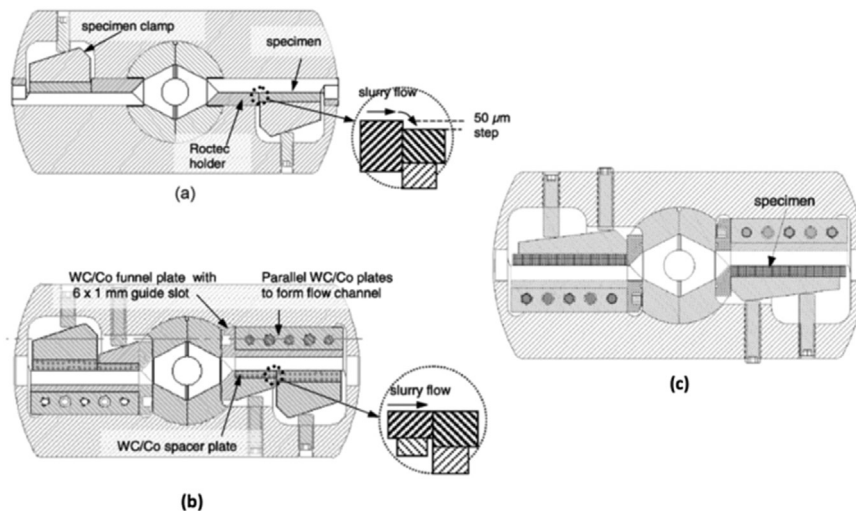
(a) The step details between the holder and the sample surface. (b) Initial modification. (c) Final modified specimen holder [143].
